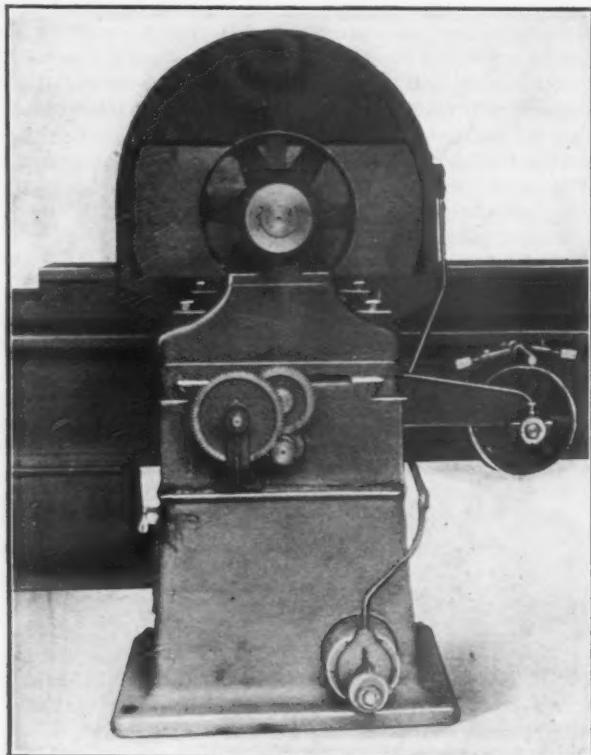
Detail Rear View of the Belt-Driven Machine.
